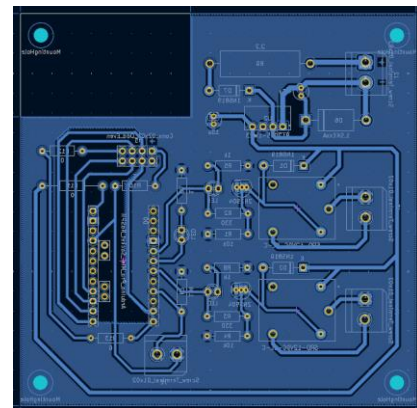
PCB layout of Receiver on KiCad to print out on toner-transfer paper
